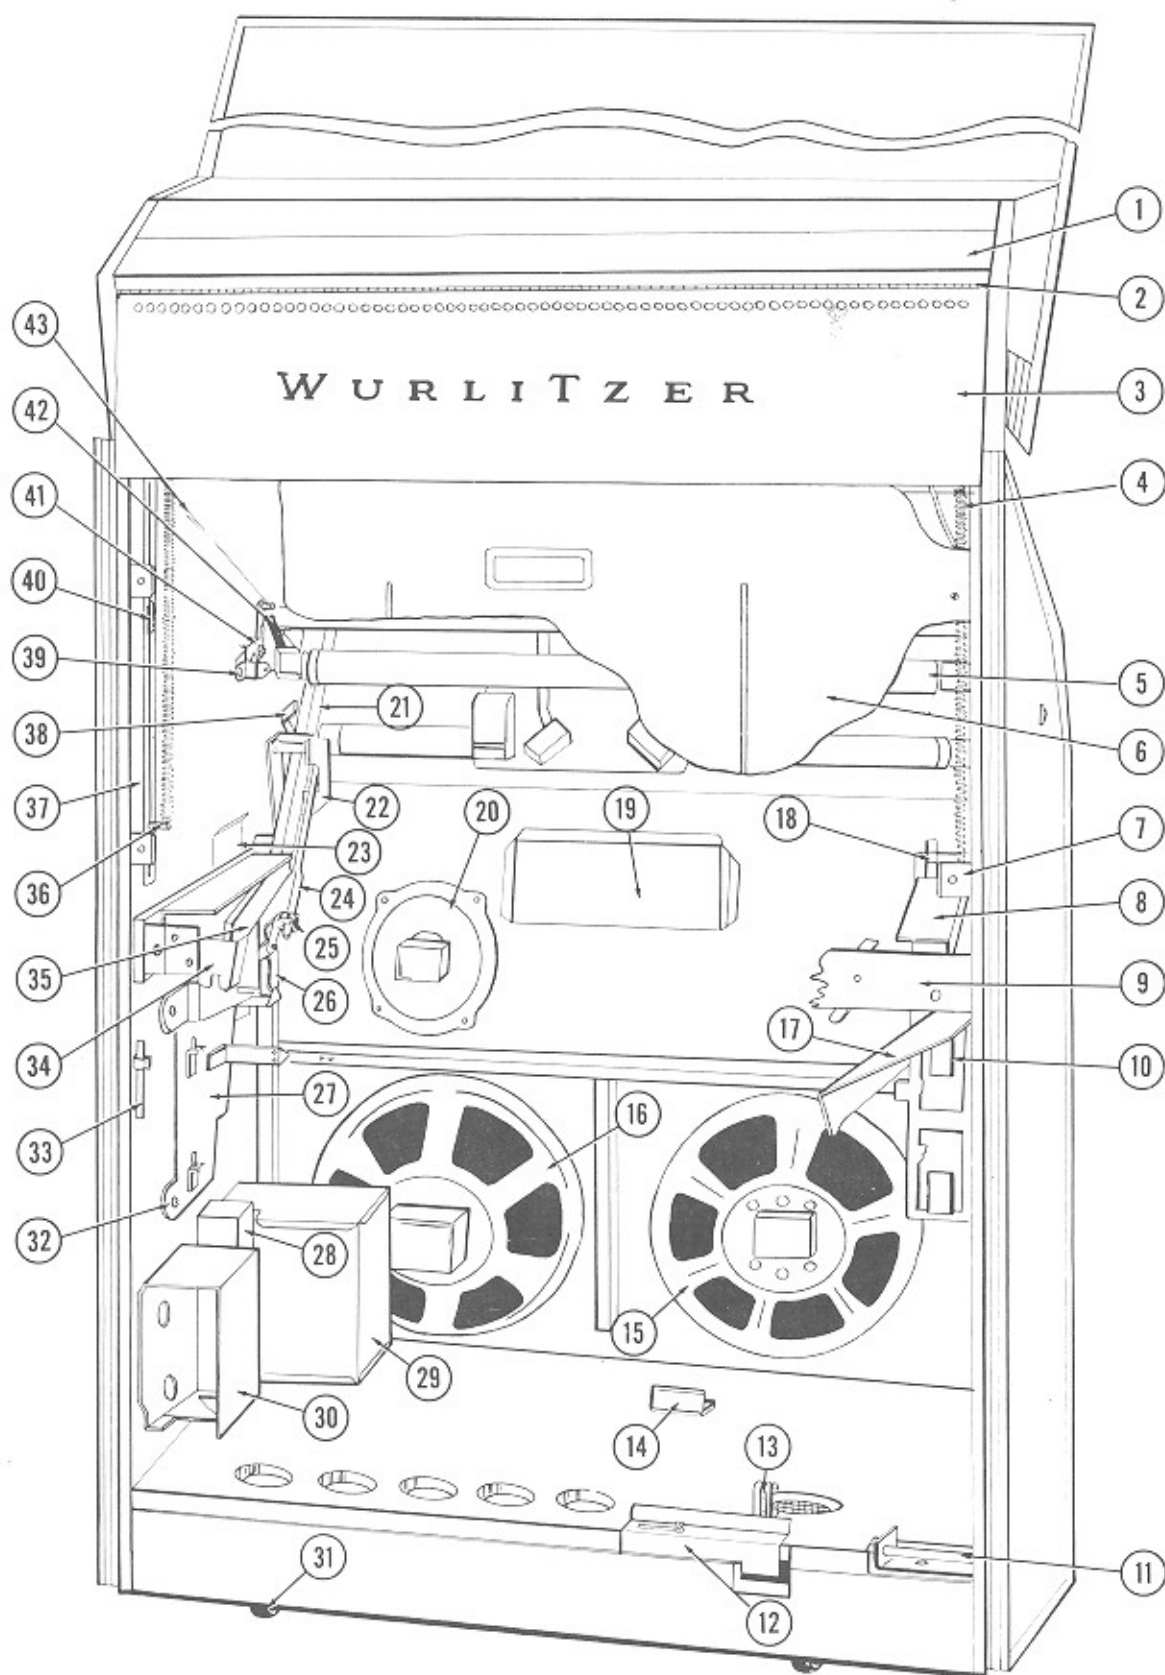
TRIM AND MOUNTING - BACK VIEW - 2800
